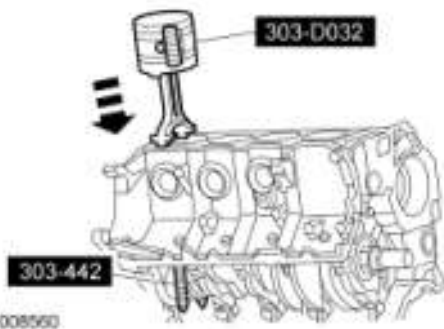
Using Special Tools To Install Piston And Connecting Rod Assembly
